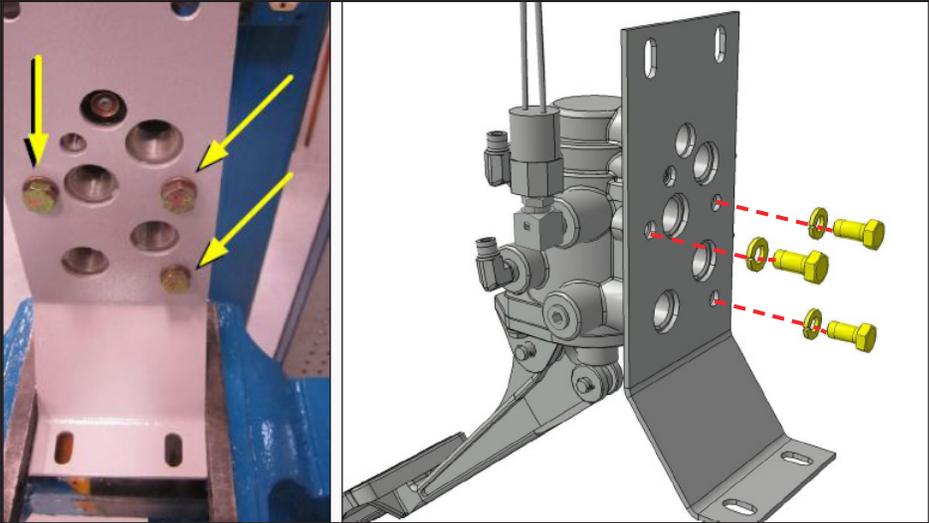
Remove and retain bolts and nuts to disconnect the bracket from the treadle valve.
